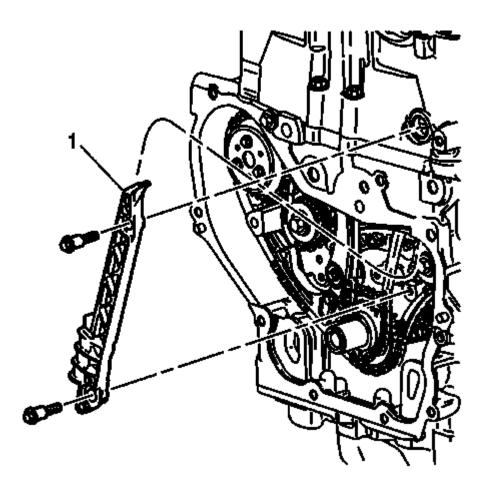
Fixed Timing Chain Guide Courtesy of GENERAL MOTORS COMPANY
